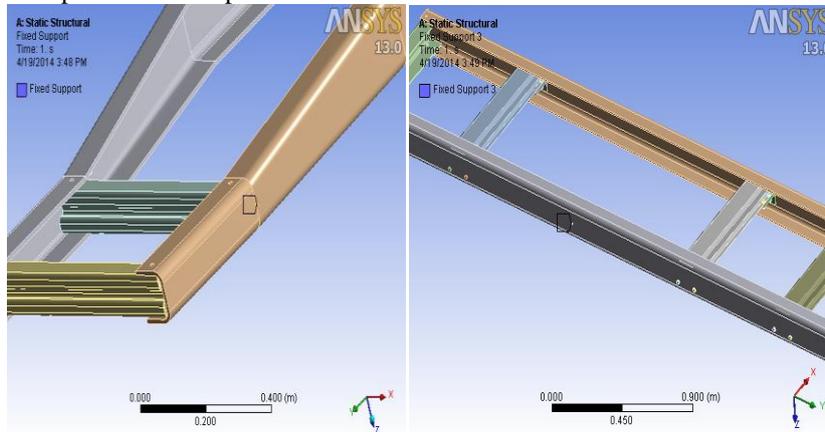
Fixed supports at Front and Rear wheel positions
